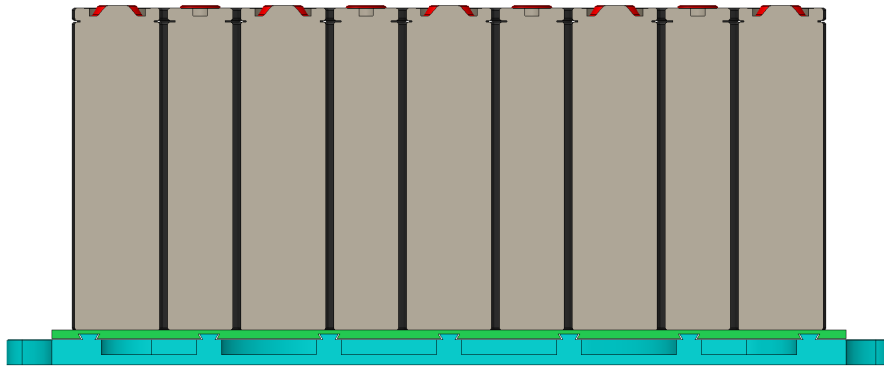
Section view of the module assembly, showing the cold plate base (blue) dovetailing with the MCPCB (green).
